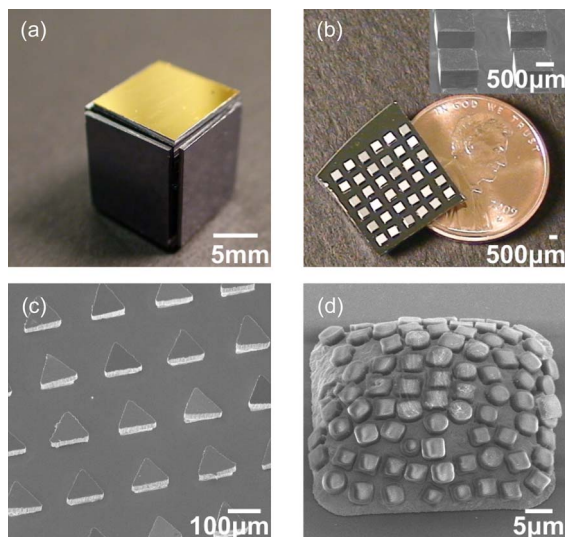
Scaling limits testing of component assembly spanning three orders of magnitude in size including (a) 1 cm Si cubes (assembly not possible), (b) 1 mm Si blocks, (c) 100 μm Si triangles, and (d) 3 μm -sized SU-8 blocks and discs.
